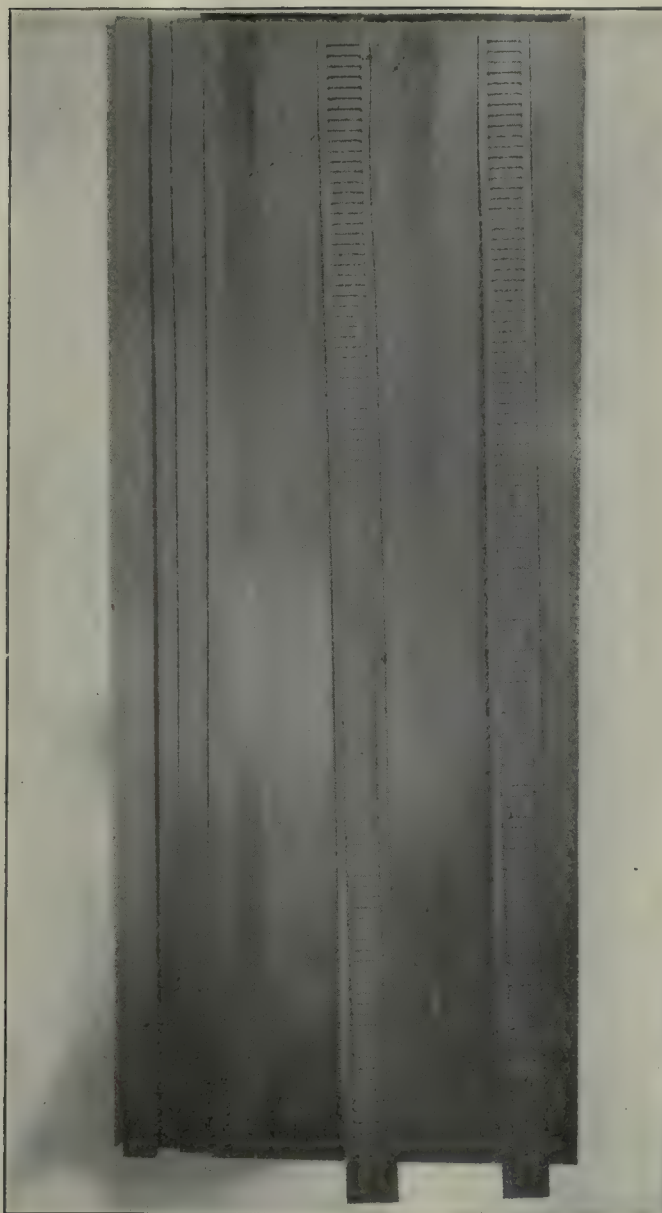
INNER SIDE, BEFORE WELDING
